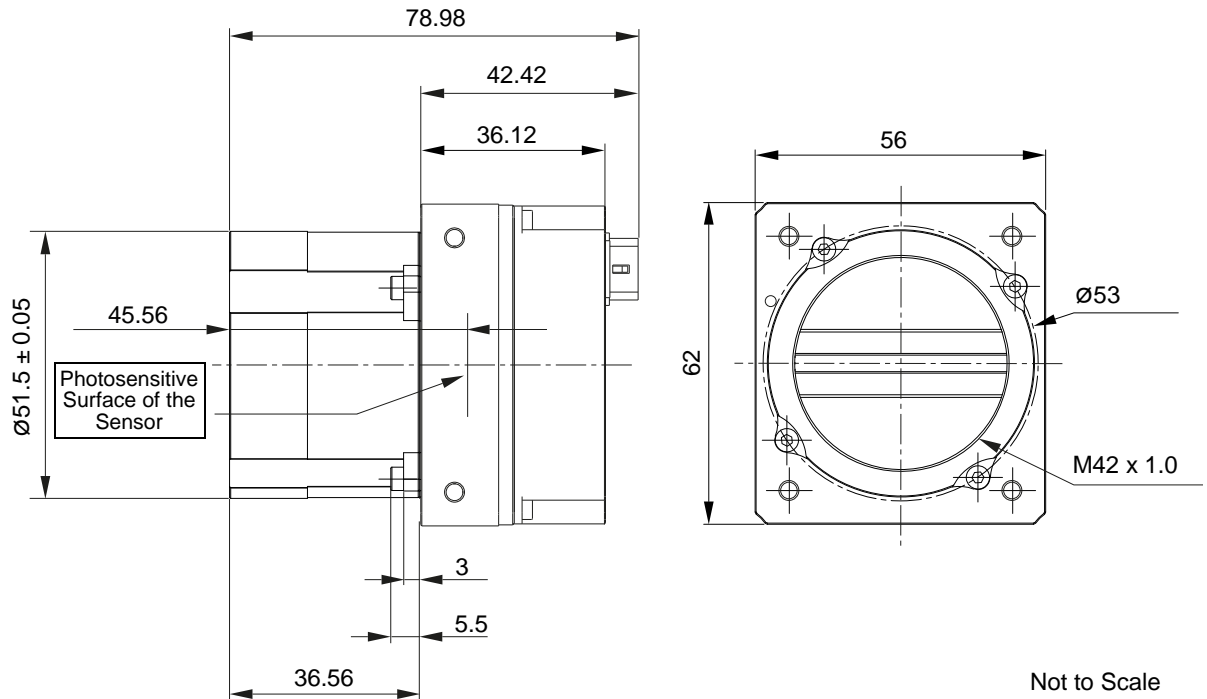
M42 x 1.0 FBD 45.56 mm Mount Adapter on a racer GigE Camera; Dimensions in mm
